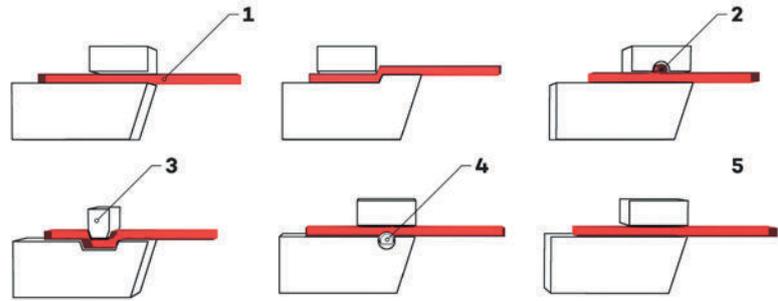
Design of clamping areas. PLEXIGLAS® blank (1), soldered-in steel wire (2), clamping frame (3), rubber ring (4); sealing strip, predominantly for slip-pressure forming where the material is to slide inwards (5).
